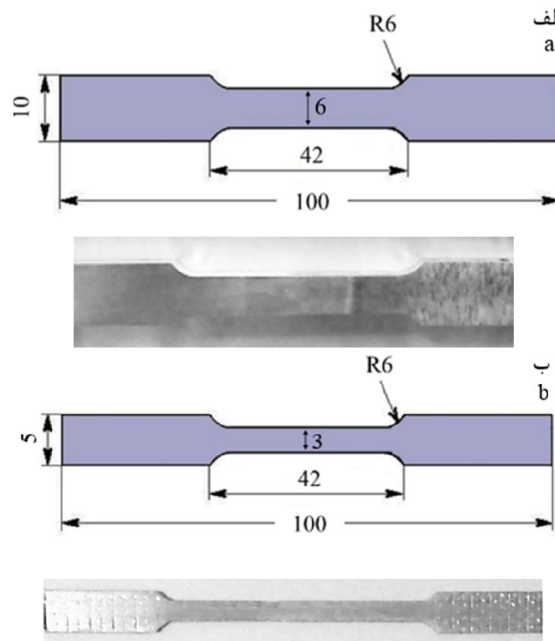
Dimensions of tensile testing specimen (mm) and prepared sample from weld; (a) transversal specimen (b) longitudinal specimen
